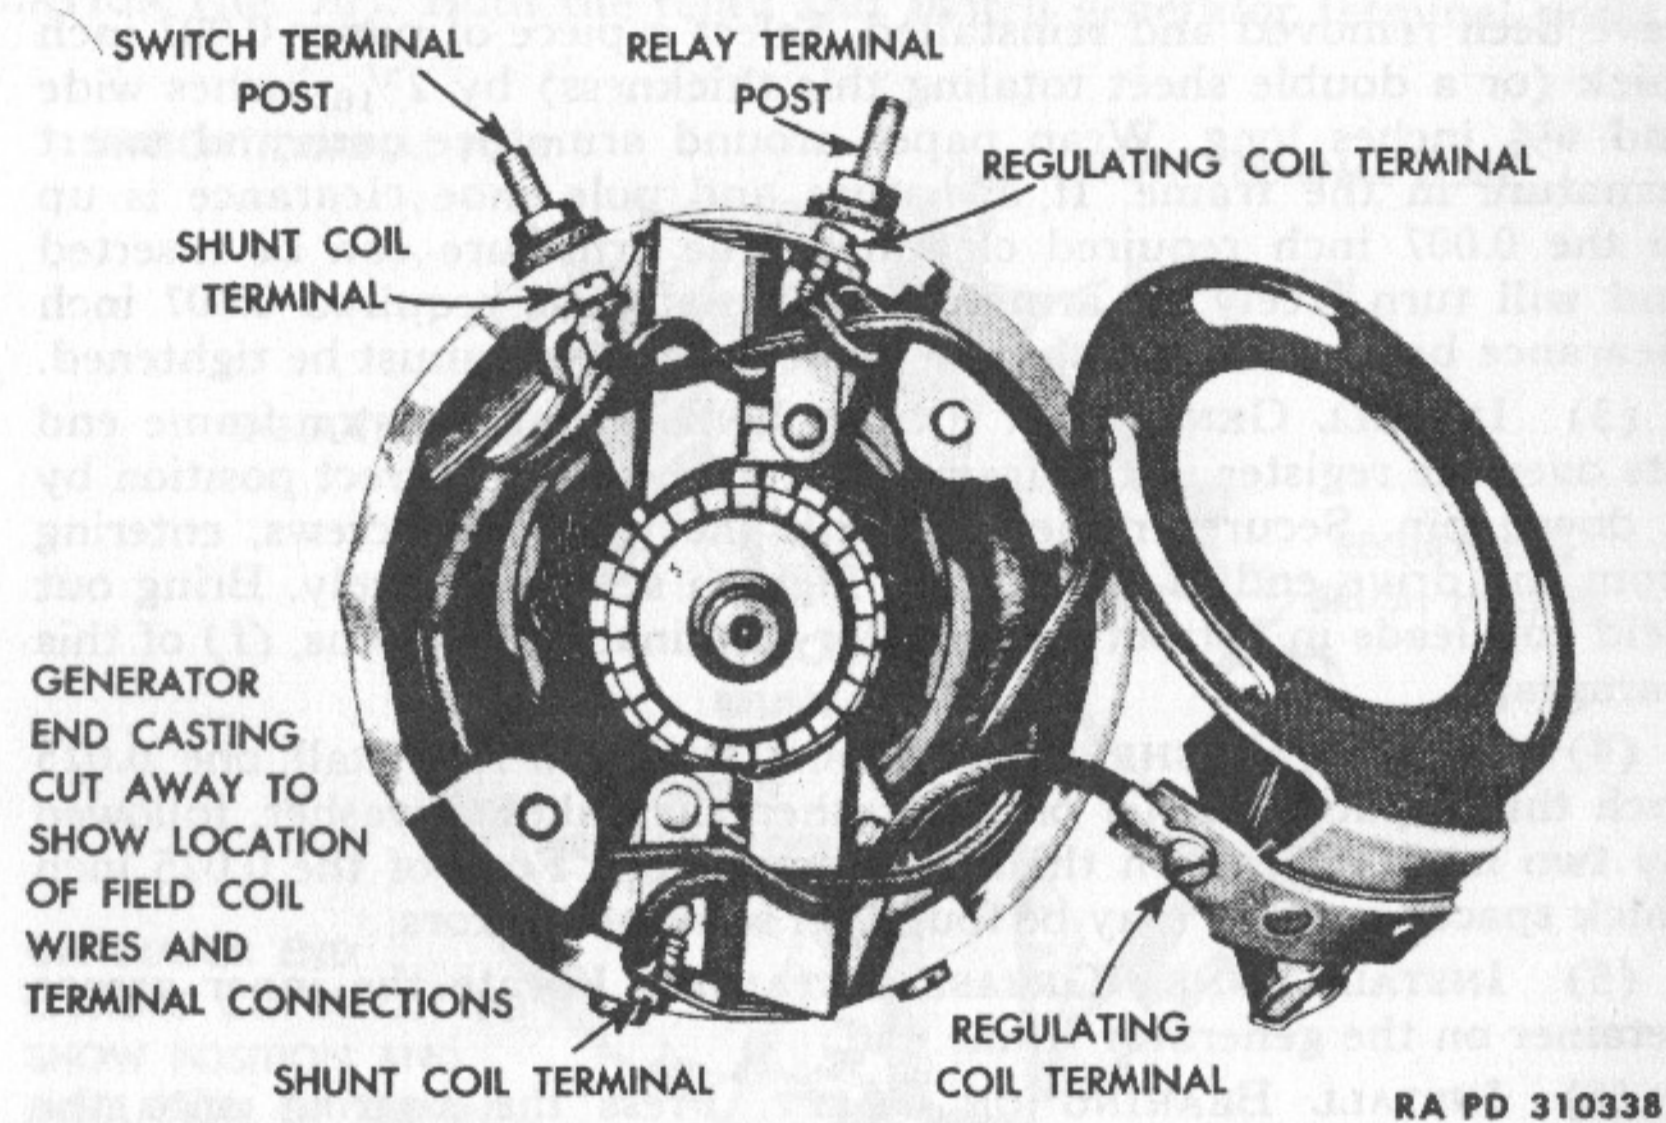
Generator Section Showing Arrangement and Connection for Field Coil Leads
